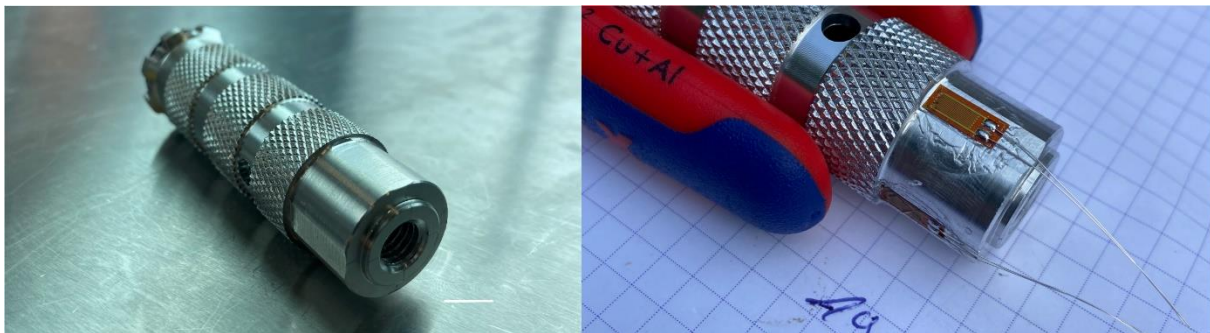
Footpeg with recess and flats machined (Left) - Strain gauges bonded (Right).
